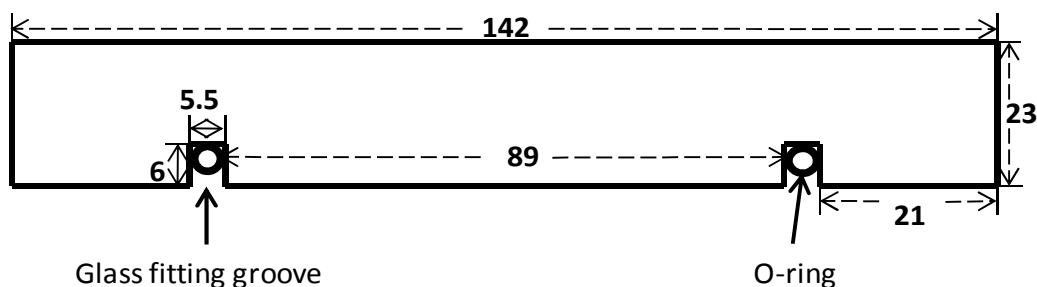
Shows the side view of the stainless steel top disk: glass fitting groove.
